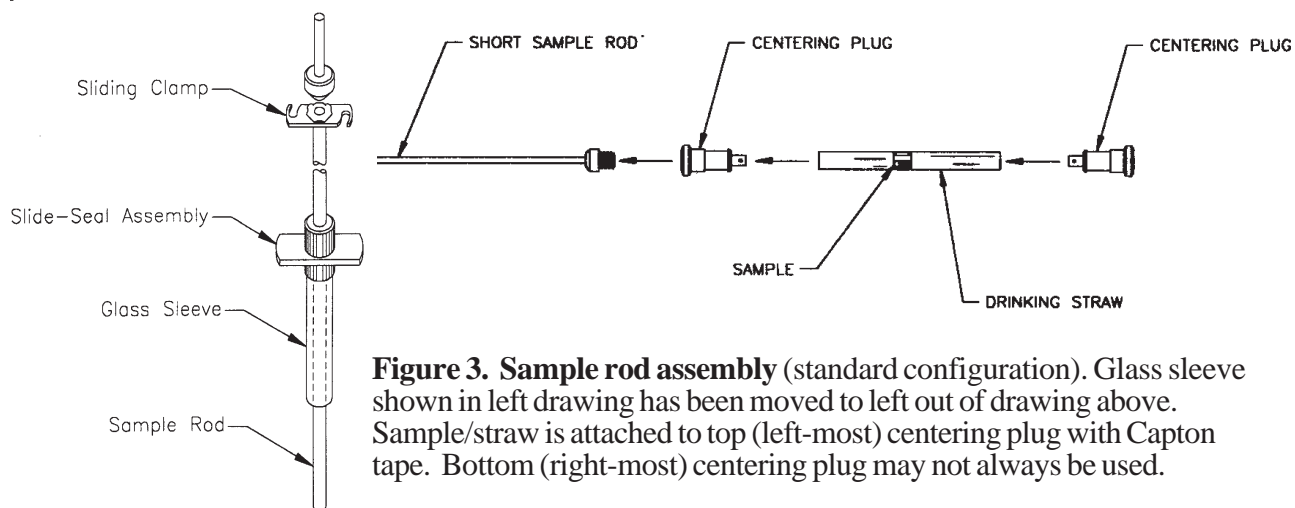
Sample rod assembly (standard configuration). Glass sleeve shown in left drawing has been moved to left out of drawing above. Sample/straw is attached to top (left-most) centering plug with Capton tape. Bottom (right-most) centering plug may not always be used.
